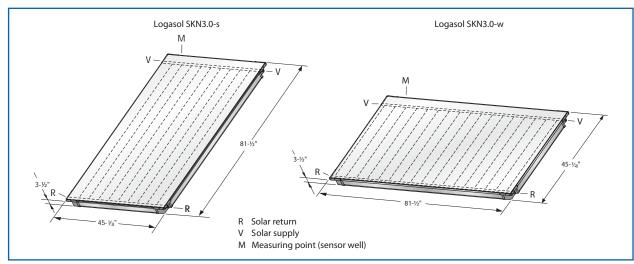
Dimensions of Logasol SKN3.0-s (portrait) and SKN3.0-w (landscape) flat-plate collectors; dimensions in mm (inches)
